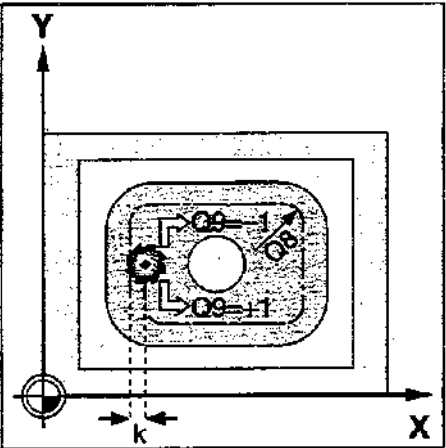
Direction of rotation Q9 and stepover factor k
